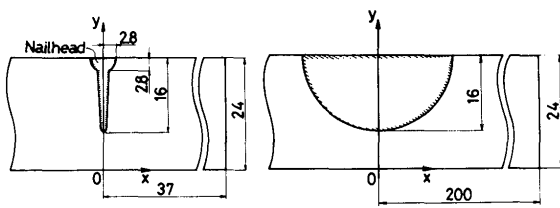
Weld Model for Analysis (Unit: mm)
